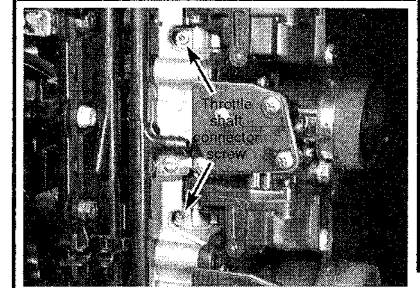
Throttle shaft connector screws-V6 shown (V4 uses one on each side)
